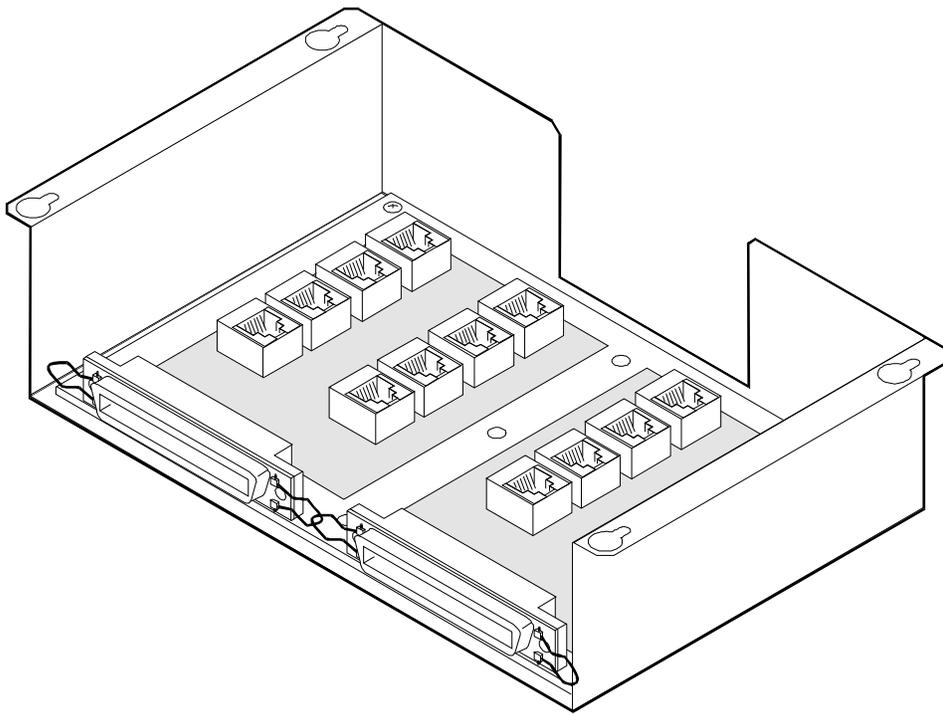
MAP/100 Tip/Ring Distribution Panel Assembly Mounted inside a Larger Cover
